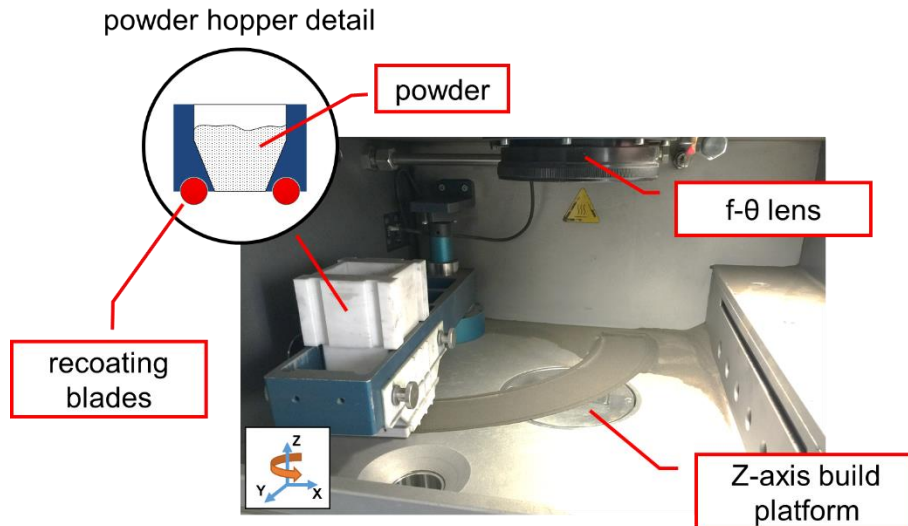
Detail of the hopper powder deposition mechanism inside the build chamber of the Realizer SLM100A machine
